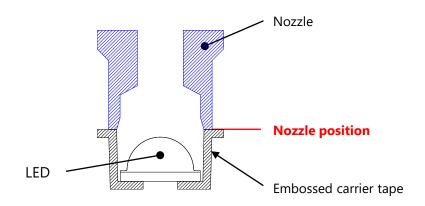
Cross-sectional view of a nozzle when transporting a LED to a PCB
